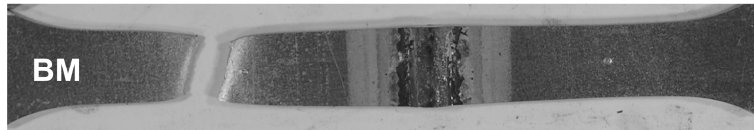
All of the HSLA '17s' welded tensile specimens failed within the base-metal during uniaxial tensile testing. The image shows the highest heat input weld (TB79) to illustrate this type of weld failure.
